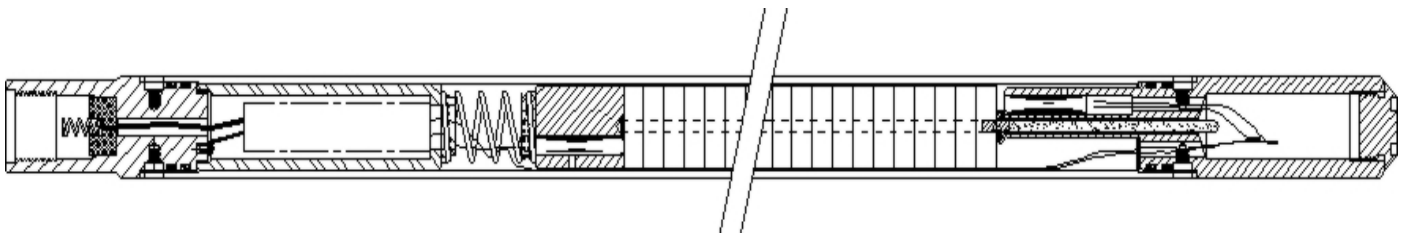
Remove 007 Viton retainer O-Ring from Load Rod. Install pellets \*\*\* until last one resides in “green” zone. Install the 007 Viton O-Ring retainer against last pellet to retain the stack in place on the Load Rod.
